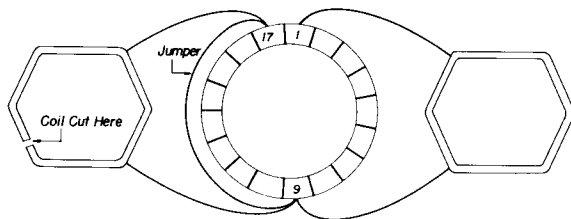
Cutting out a shorted coil on a wave winding.
